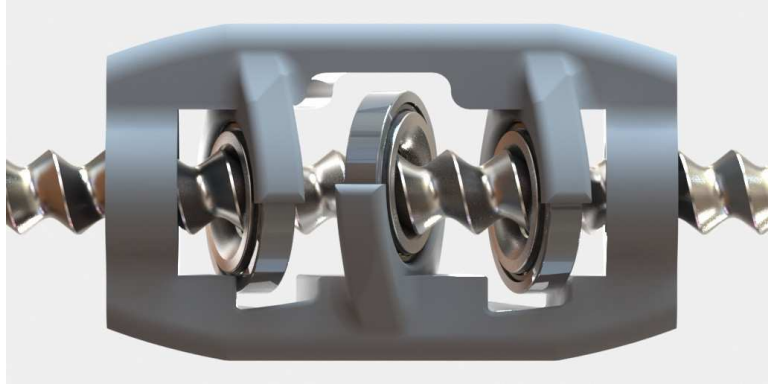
CAD render of a ring screw mechanism with a three-ring nut
